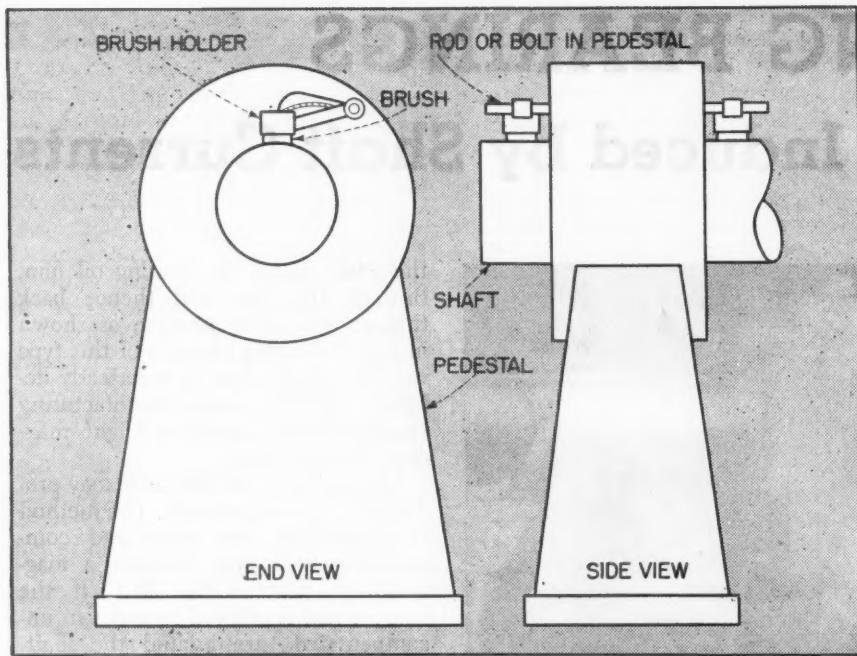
A.c. or d.c. bearing currents may be reduced to harmless values by shunting them out of the shaft with brushes attached to the bearing housing and riding on the shaft.
